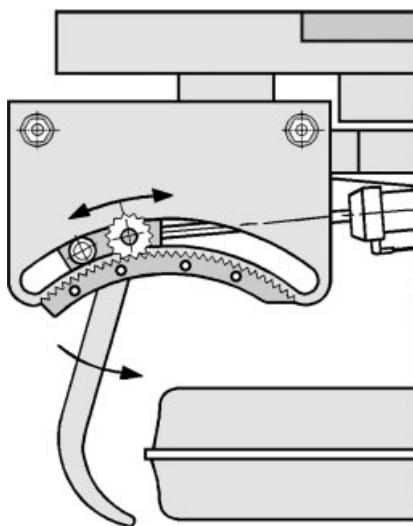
Sack gripper for palletizing tasks (*Roteg*)
